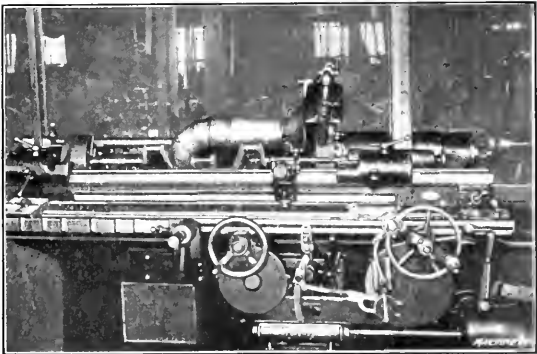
Grinding the Gear Fit on the Norton Grinder
